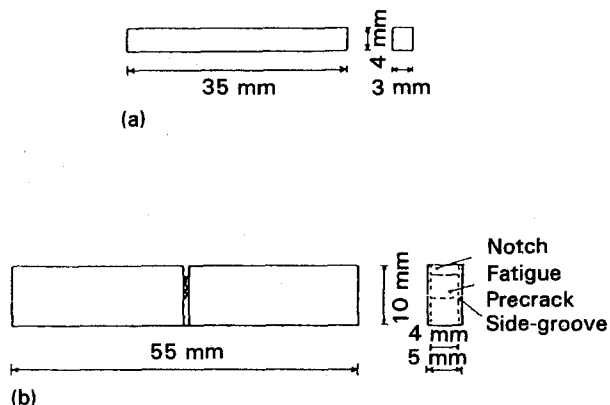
Geometry of the test specimens (all dimensions are in mm): (a) three-point-bend specimen, and (b) side-grooved toughness specimen.
